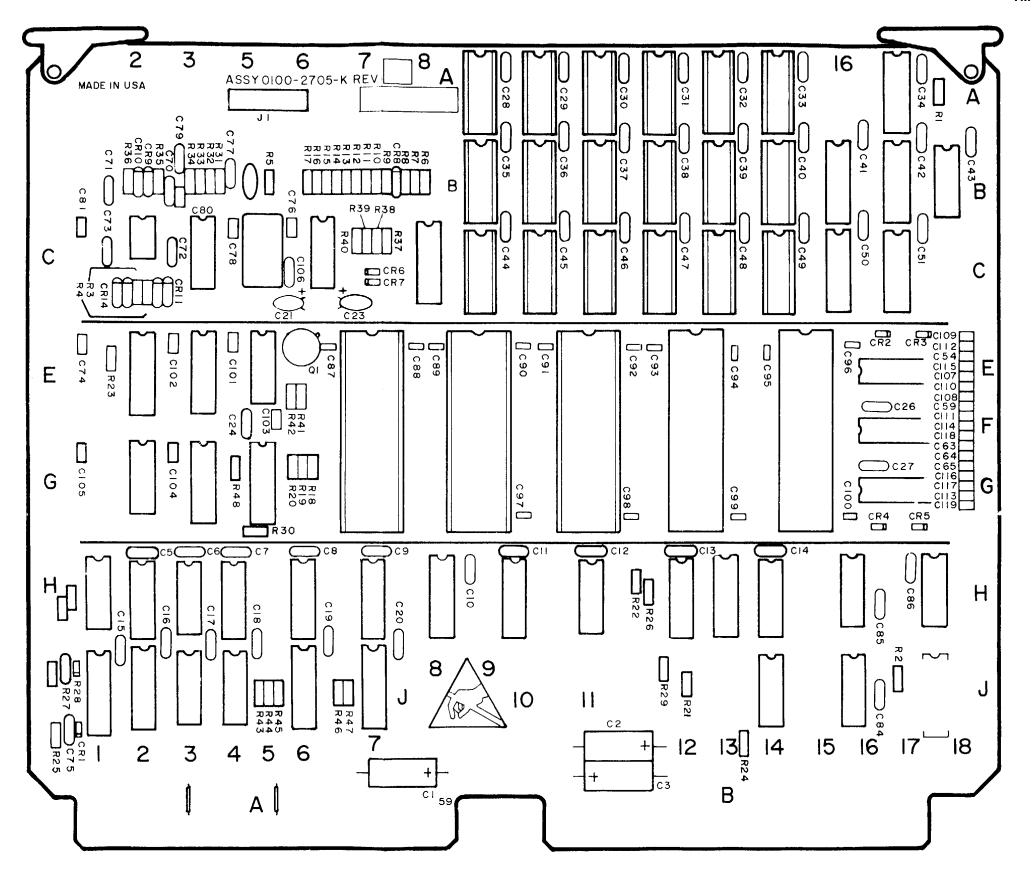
Processor Board 0100-2705 Assembly Drawing
